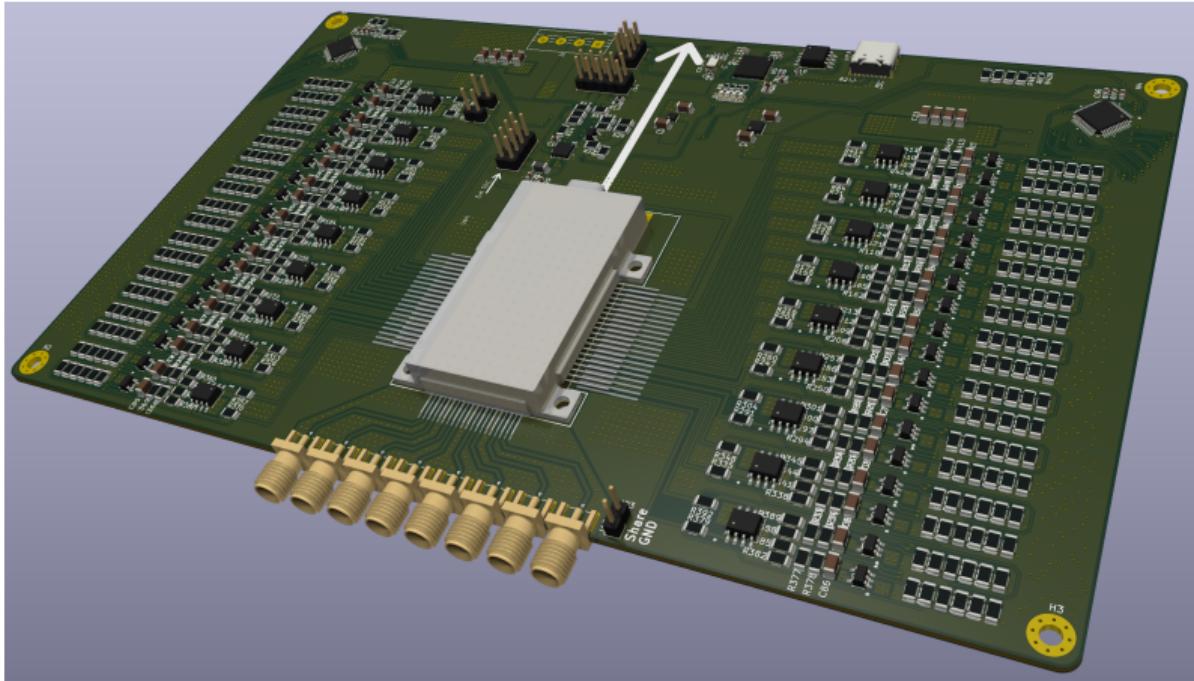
3D rendering of the designed PCB using kicad 9.0
